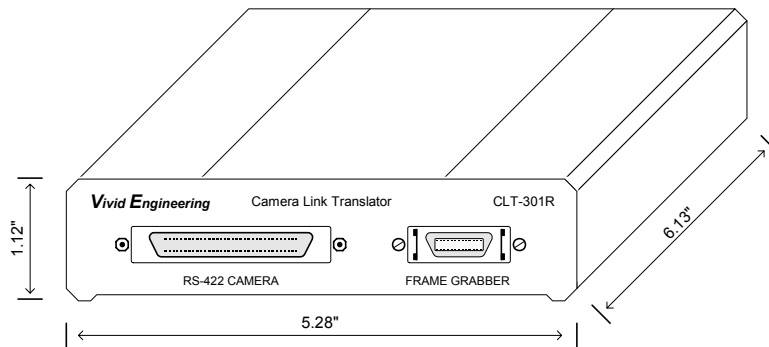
CLT-301R/L/M Cabinet Dimensions
